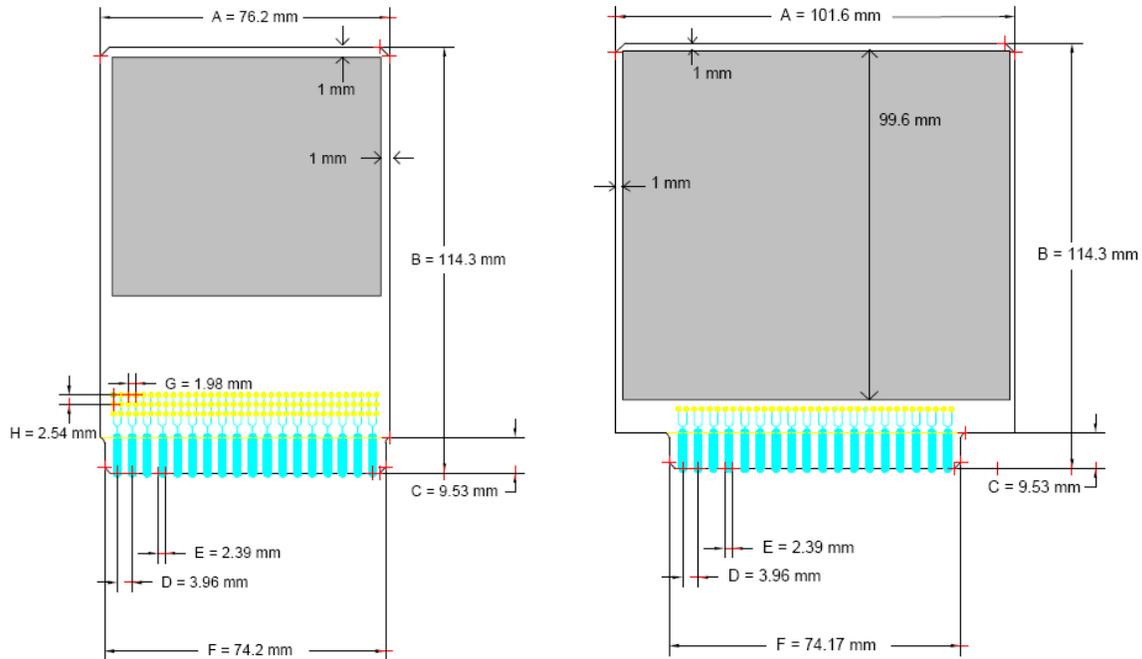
JEDEC 51-7 standard PCB sizes for POL converters used in thermal testing. One POL package per square PCB is used, the size of which is chosen based on the POL module length dimension [133].
